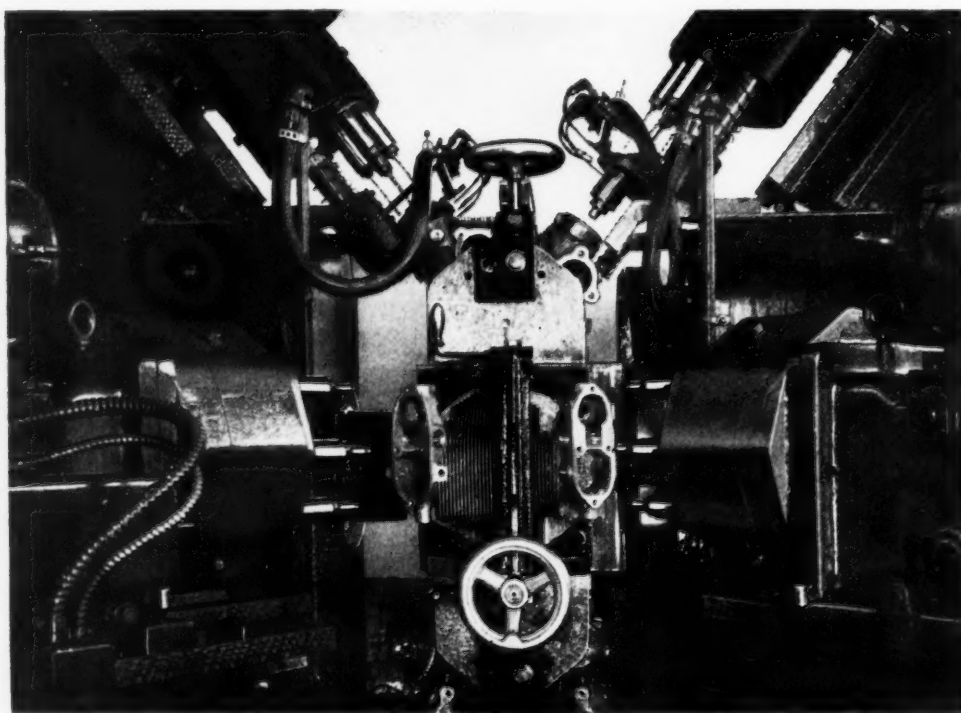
Hydraulically Actuated Machine Equipped with Six Tool-heads and an Indexing Fixture for Drilling, Countersinking, and Tapping Four Holes in the Two Rocker Boxes of the Cylinder Heads
